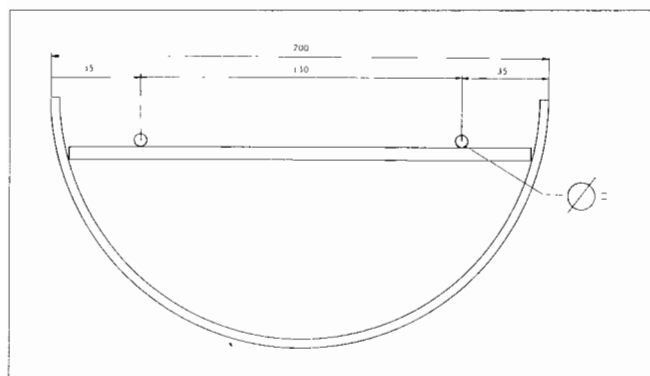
Cross-section through a gutter in which the produced larvae can be collected (measurements in mm.).
